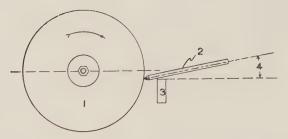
Wheel Dresser, Shown in Proper Position to Wheel. 1, wheel; 2, wheel dressing tool; 3, rest for tool; 4, angle at which the dresser should be held to the wheel.
